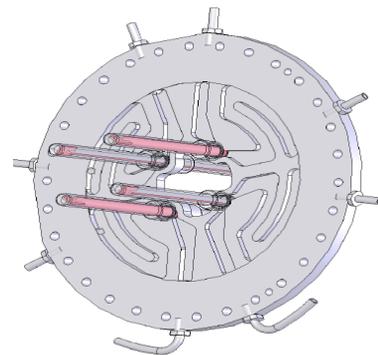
The mechanical drawing of the coupling plate, on which the rods are installed and embedded with water-cooling channels.
